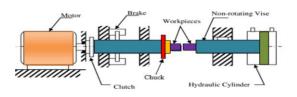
Illustrative diagram of a direct drive friction welding (Senthil *et al.*, 2020)
